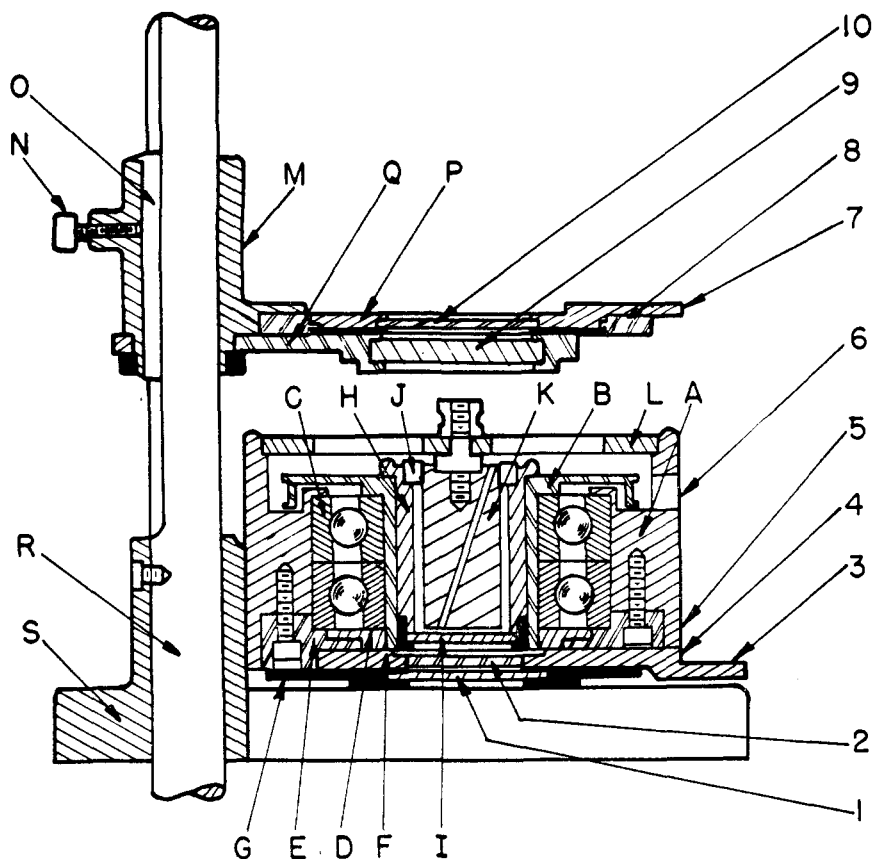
Apparatus of Edsall, Rich, and Goldstein (46). K is the stationary inner cylinder; the rotating outer cylinder B holds a removable cup H in which the liquid is placed.
